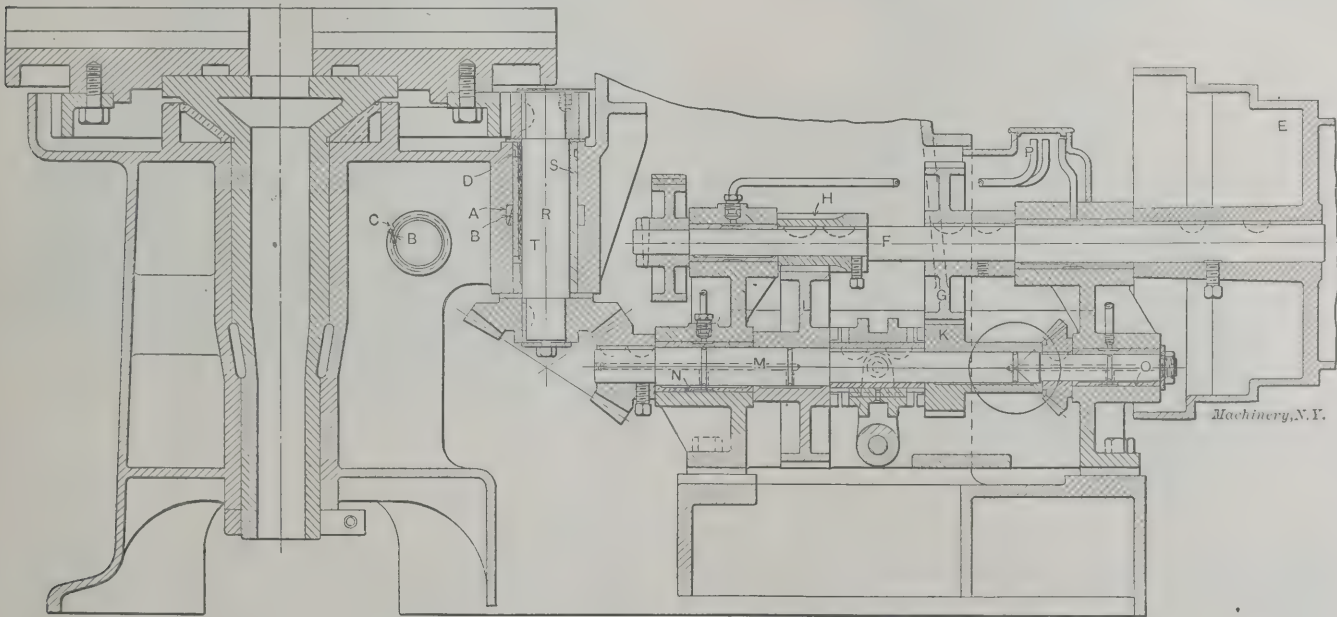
Section through Driving Mechanism of Colburn Vertical Boring Mill
